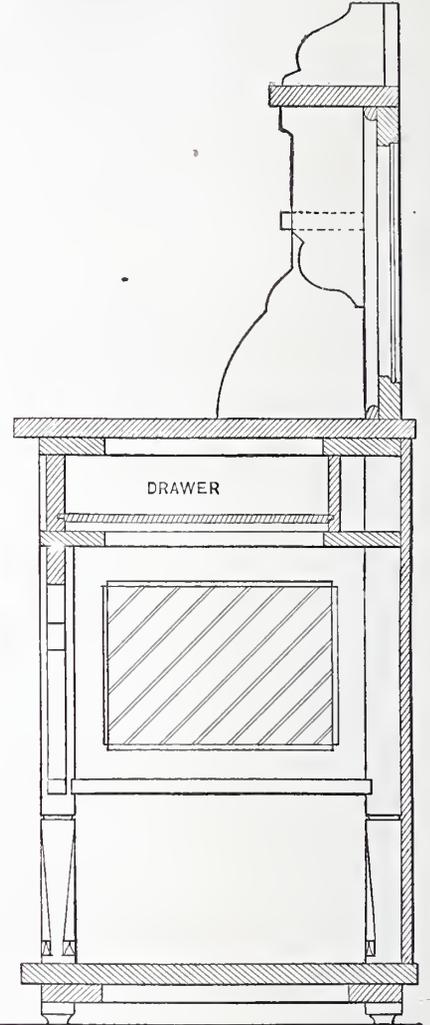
Vertical Section.—Scale, 1 Inch to the Foot.
